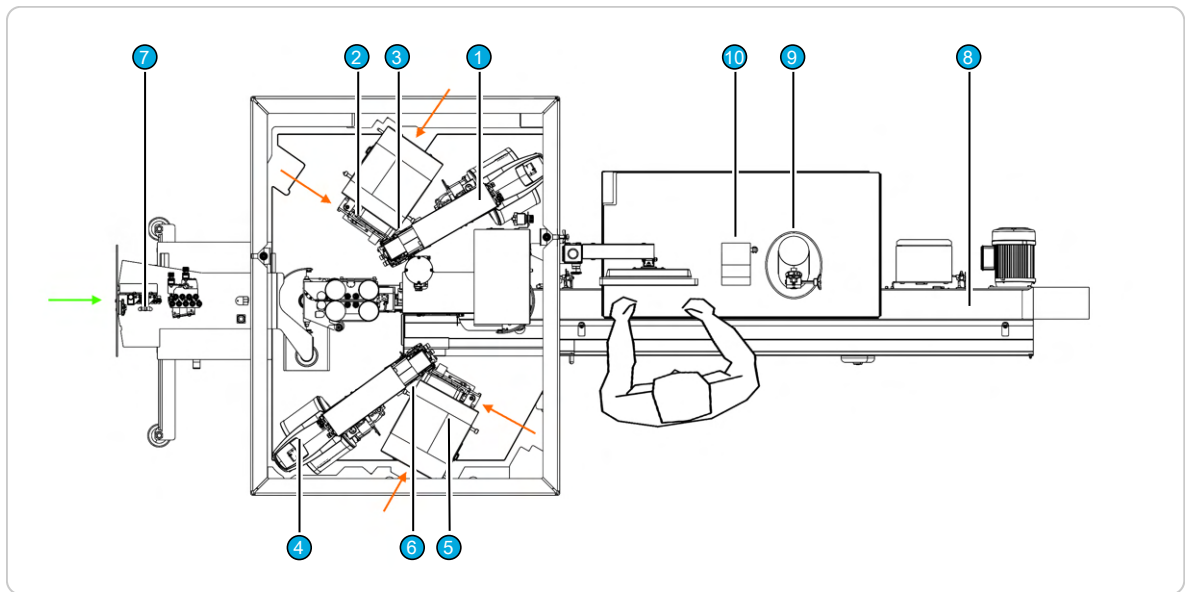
CrimpCenter 36 S - Sample Configuration - Crimp and Seal
